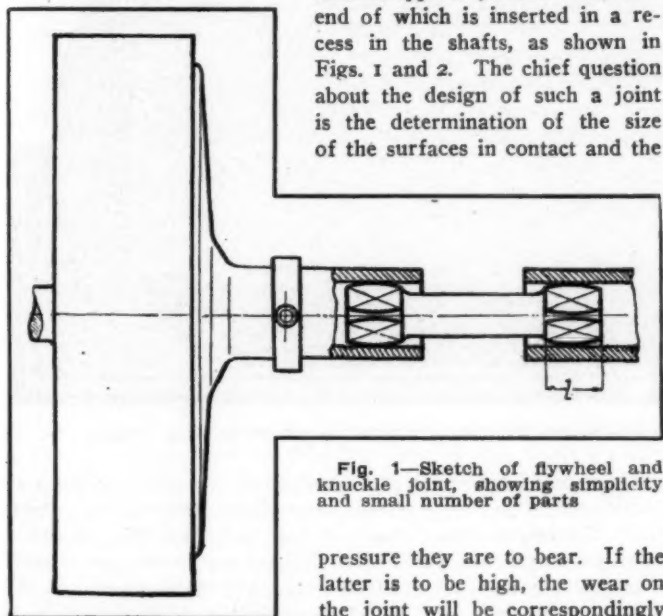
Sketch of flywheel and knuckle joint, showing simplicity and small number of parts
